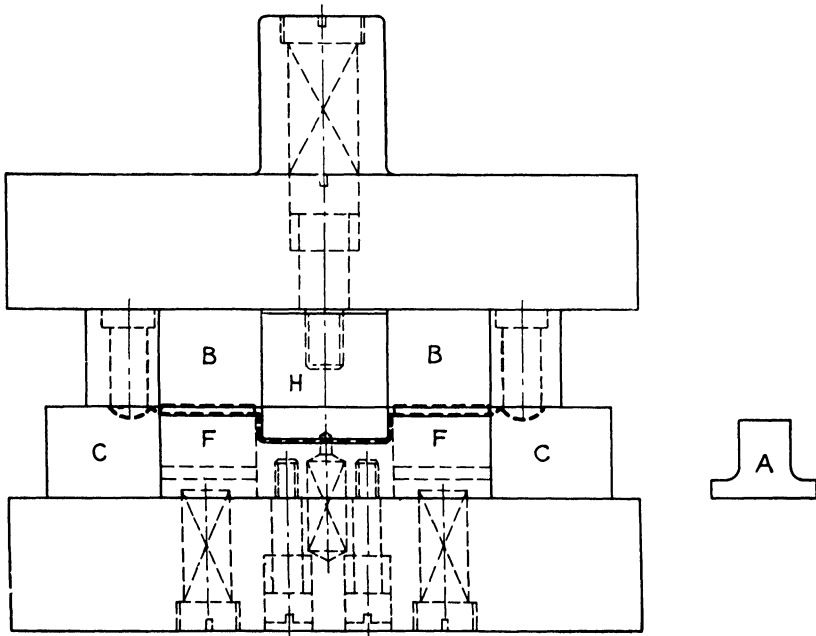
In the first forming die the blank is positioned sidewise between four gage pins and endwise by a gage pin in spring-pad shedder *D* within the die. The pin in the shedder engages in the center hole of the blank.
